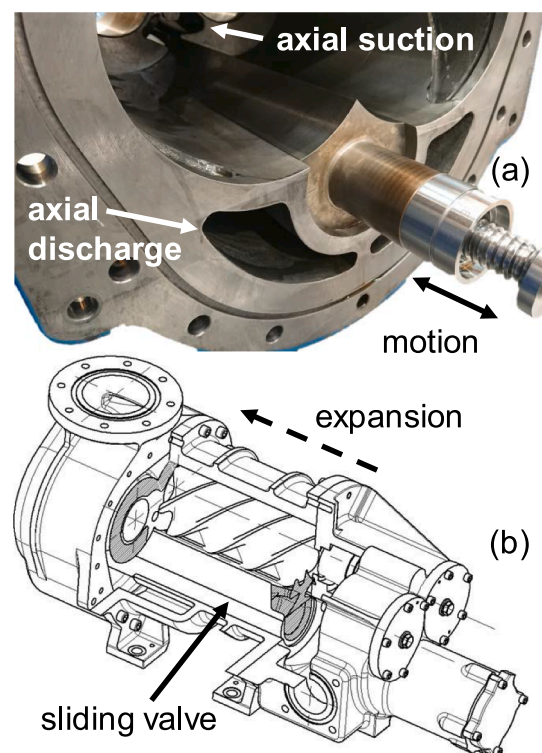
Sliding valve implementation in the modelled twin-screw expander: (a) picture of the expander with the valve fully tightened, (b) 3D view of the machine having the sliding valve fully open (courtesy of Howden Compressors Ltd.).
